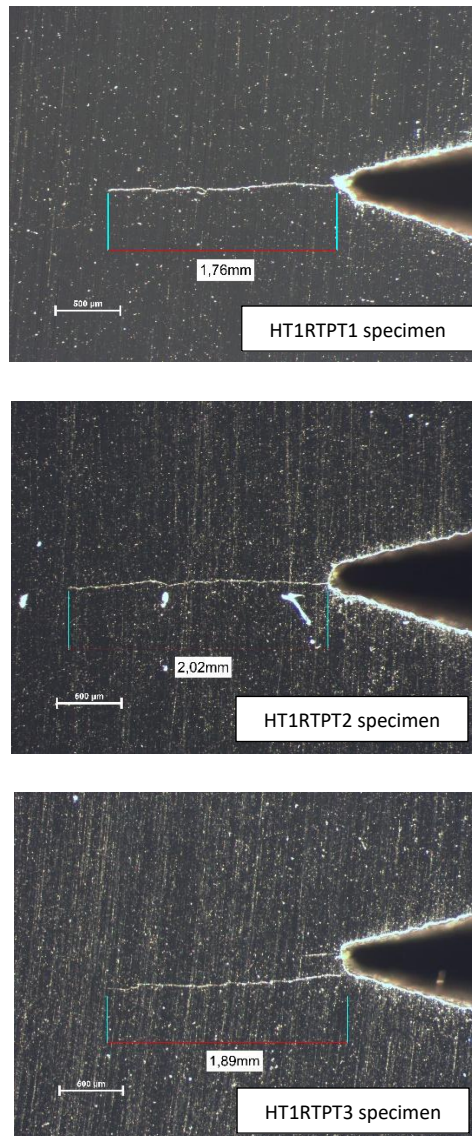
Figure of all HT1 pre-cracked specimens under microscope
